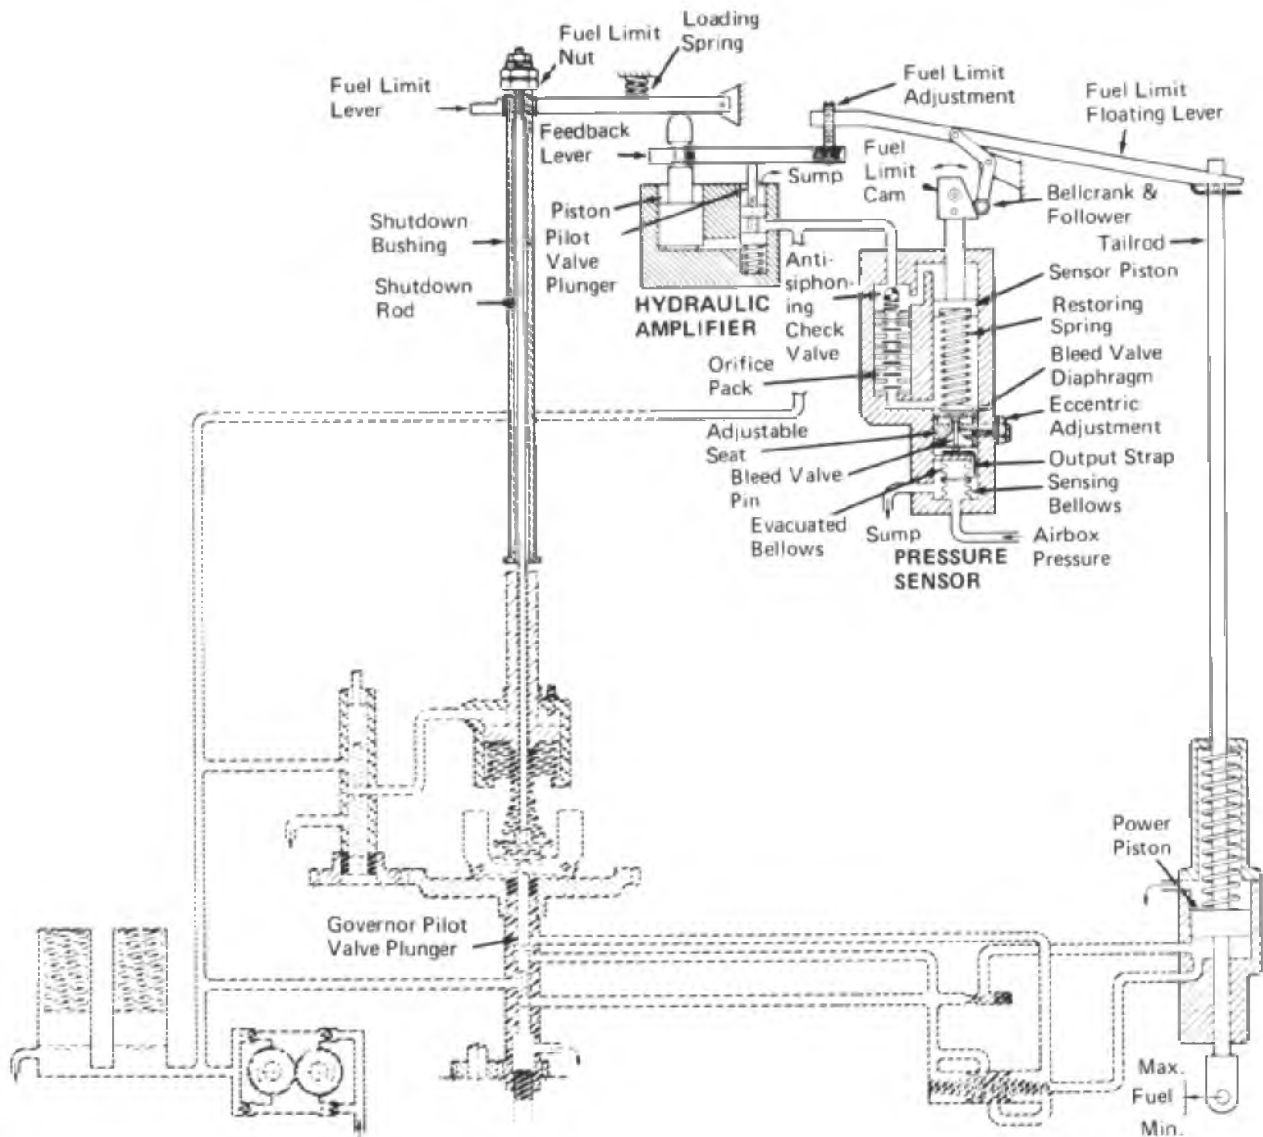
Air Pressure Sensor Assembly Schematic
